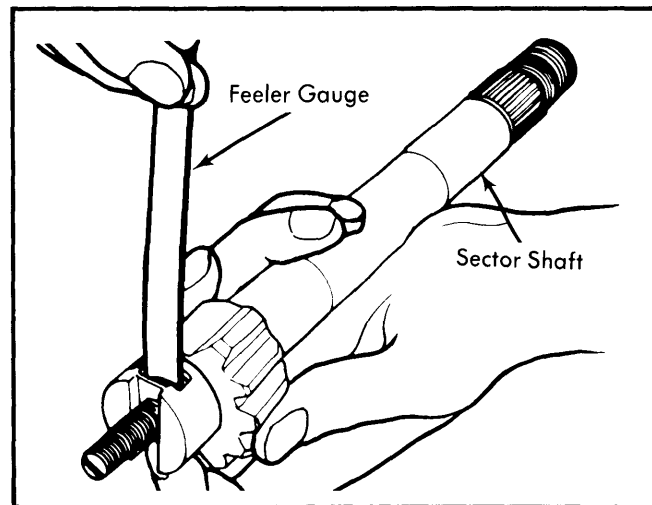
Measuring Sector Shaft-to-Adjusting Screw End Play
